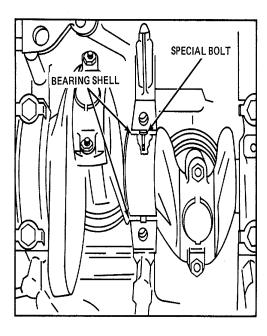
Removing Upper Main Bearing Shell (Except Rear Main)
